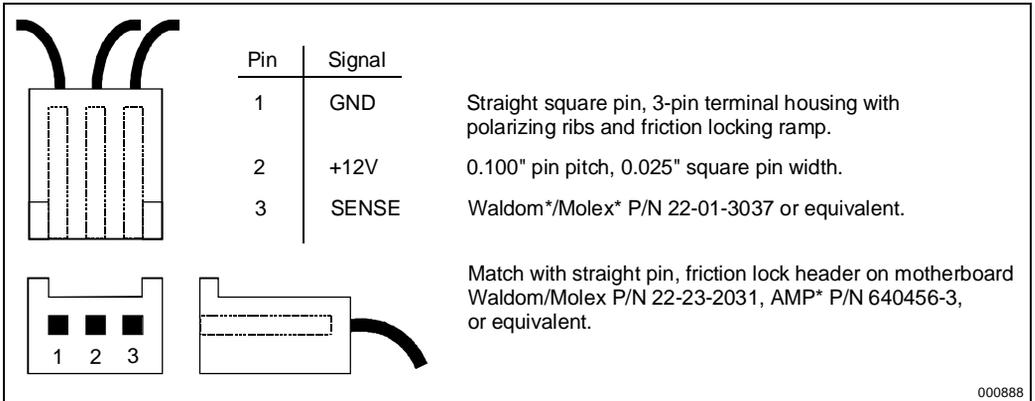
Boxed Processor Fan/Heatsink Power Cable Connector Description
